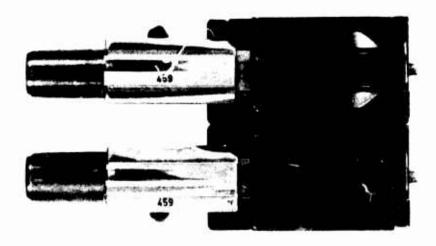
Difference between Bottoms of HK-23Al Machine Gun Bolt-and-Carrier Assemblies Used for Belt-Fed (TOP) and Magazine-Fed (BOTTOM) Weapon Configurations.
